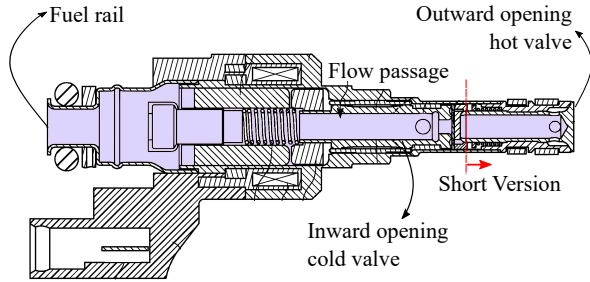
Sectional view of the prototype DI CNG injector, indicating the coloured flow path and location of the short version, inward and outward opening valves [13].
